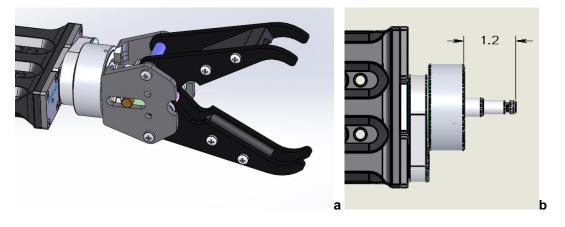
JAWS / DRIVE SHAFT POSITION
